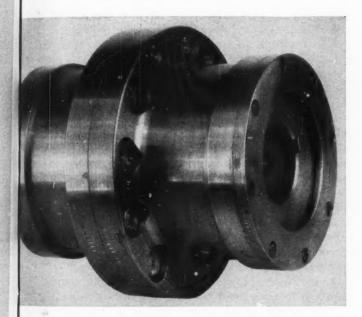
Above — Hubtype gear coupling, for 2½-inch shafts, is continuously lubricated by oil directed into the ends from nozzles. The oil drains into a guard through the small holes near the bolting flanges
